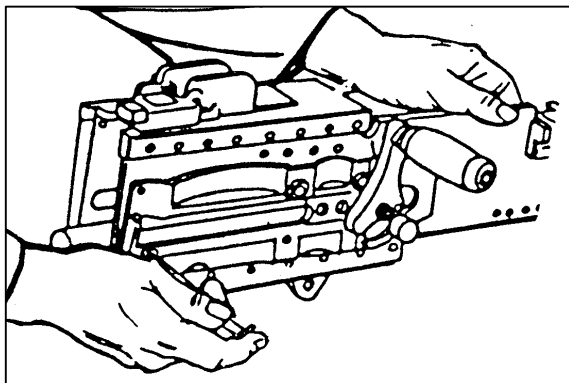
Removal of the sear slide, sear, and sear spring.
